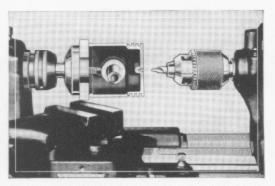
Drilling Center Hole in an Oversize Piston on the No. 44 Piston Adapter
